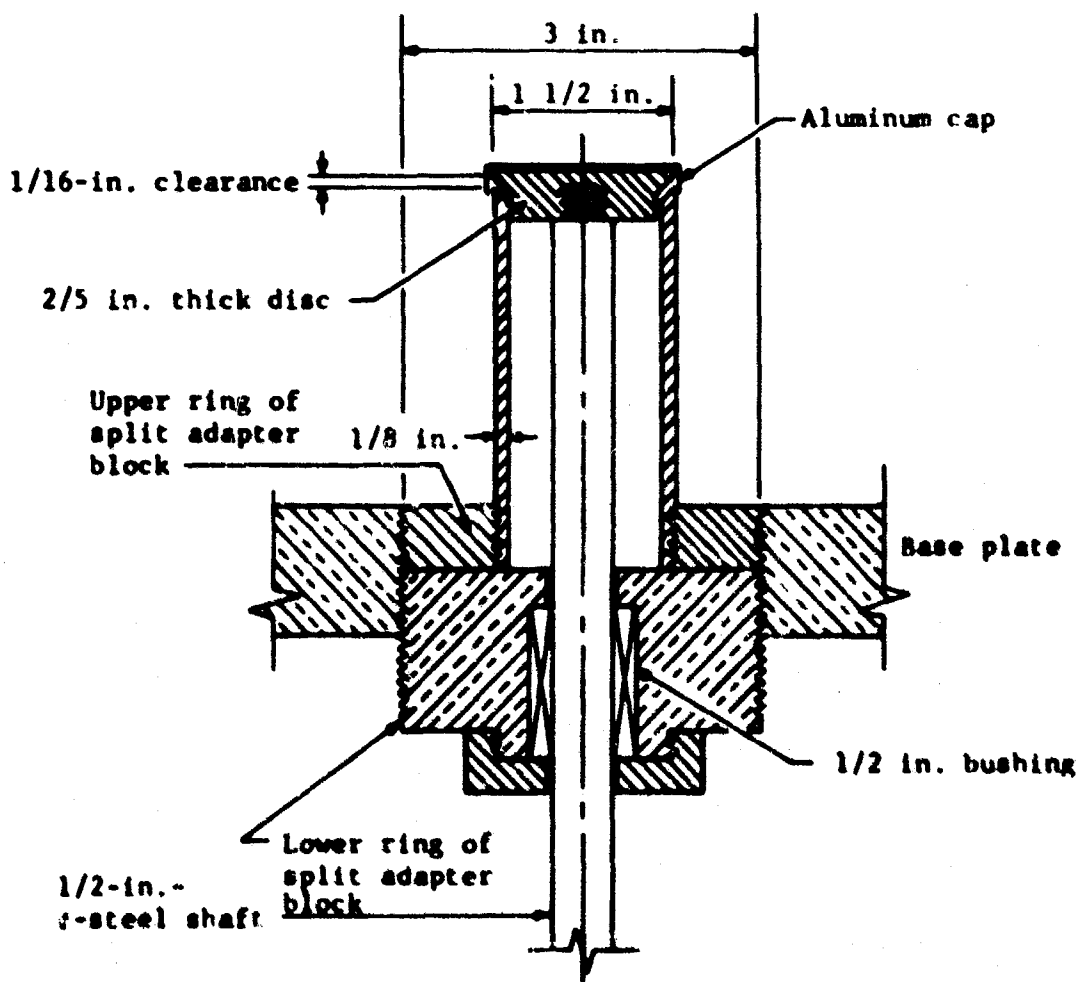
Details of Test Arrangement for Buried Disc Structures
